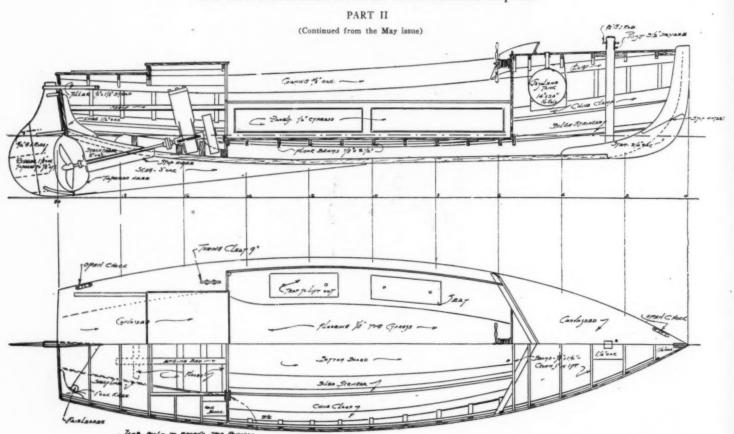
Inboard profile, half deck, and framing plans, at scale of 36 inch equals I foot. The inboard profile and plans show clearly the method of construction, how the motor is installed, and the general arrangement throughout
